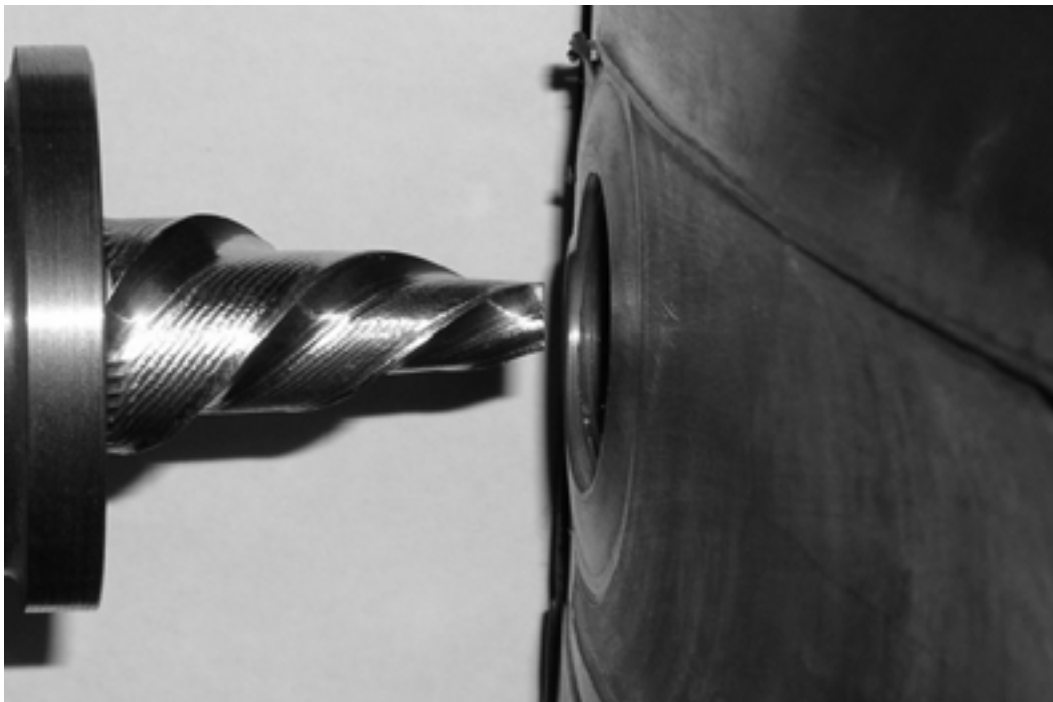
FSW welding about to start. To the left of the image the tool is visible.
